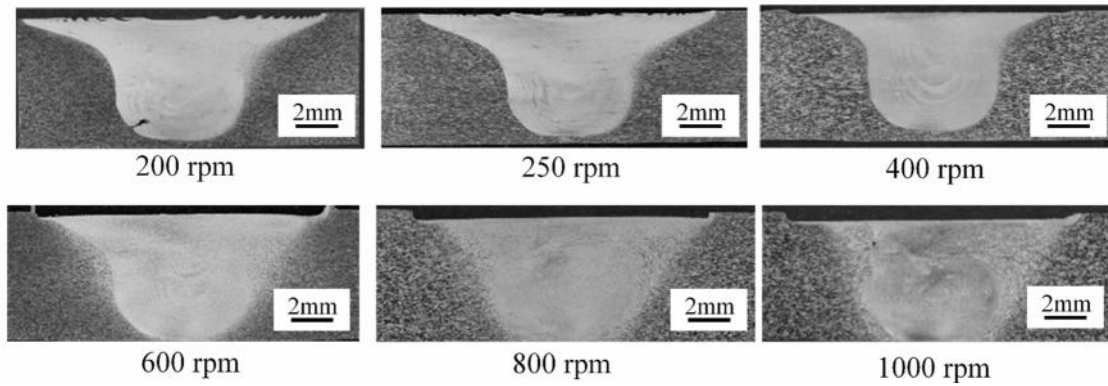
Macrographs of welded panels with the advancing side (AS) on the left.
